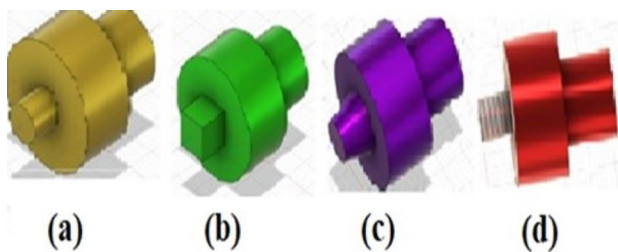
Several commonly used FSW tool pin profiles a cylindrical tool, b square tool, c cylindrical tapered, d cylindrical threaded tool [7]
